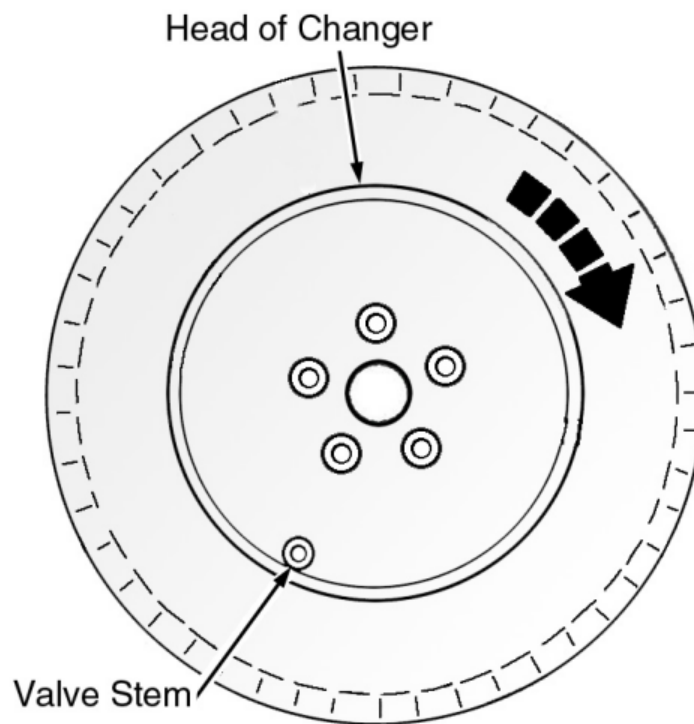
Mounting Tire Using Rotating Wheel Machine
